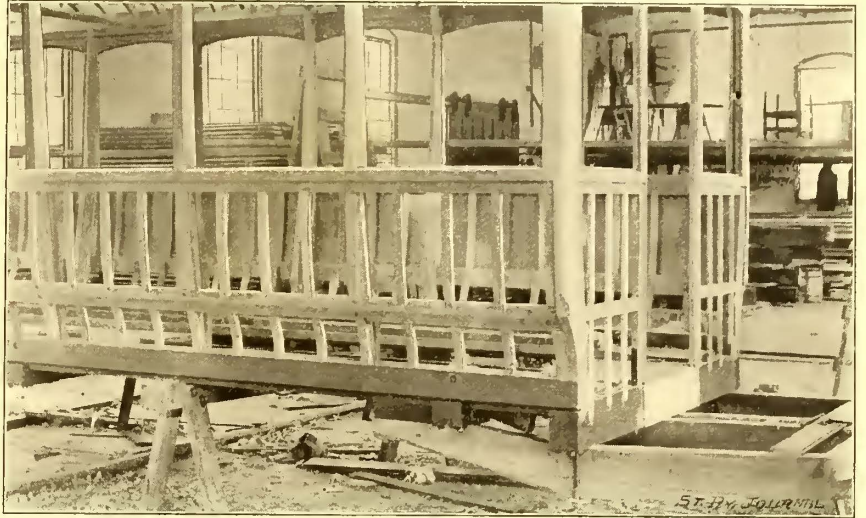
FRAME OF TWENTY-FIVE FOOT CAR FOR WEST END RAILWAY.
